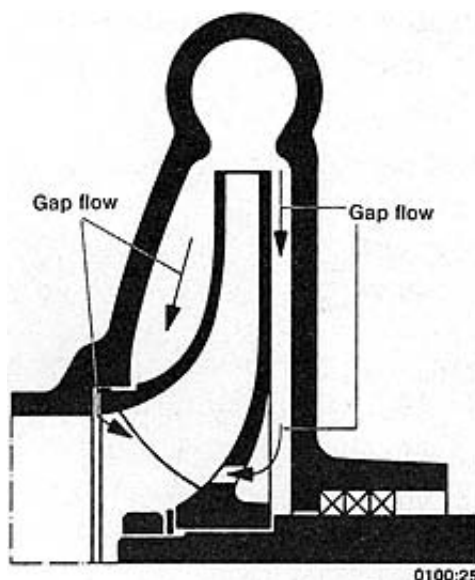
Balancing the axial thrust in a single stage centrifugal pump with balance holes only
